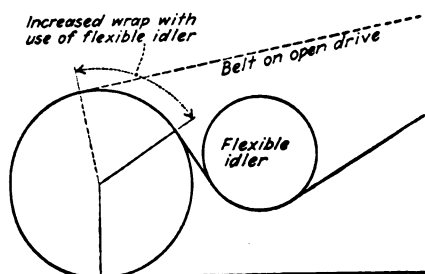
This shows why a flexible idler drive will transmit more power than an open drive.
